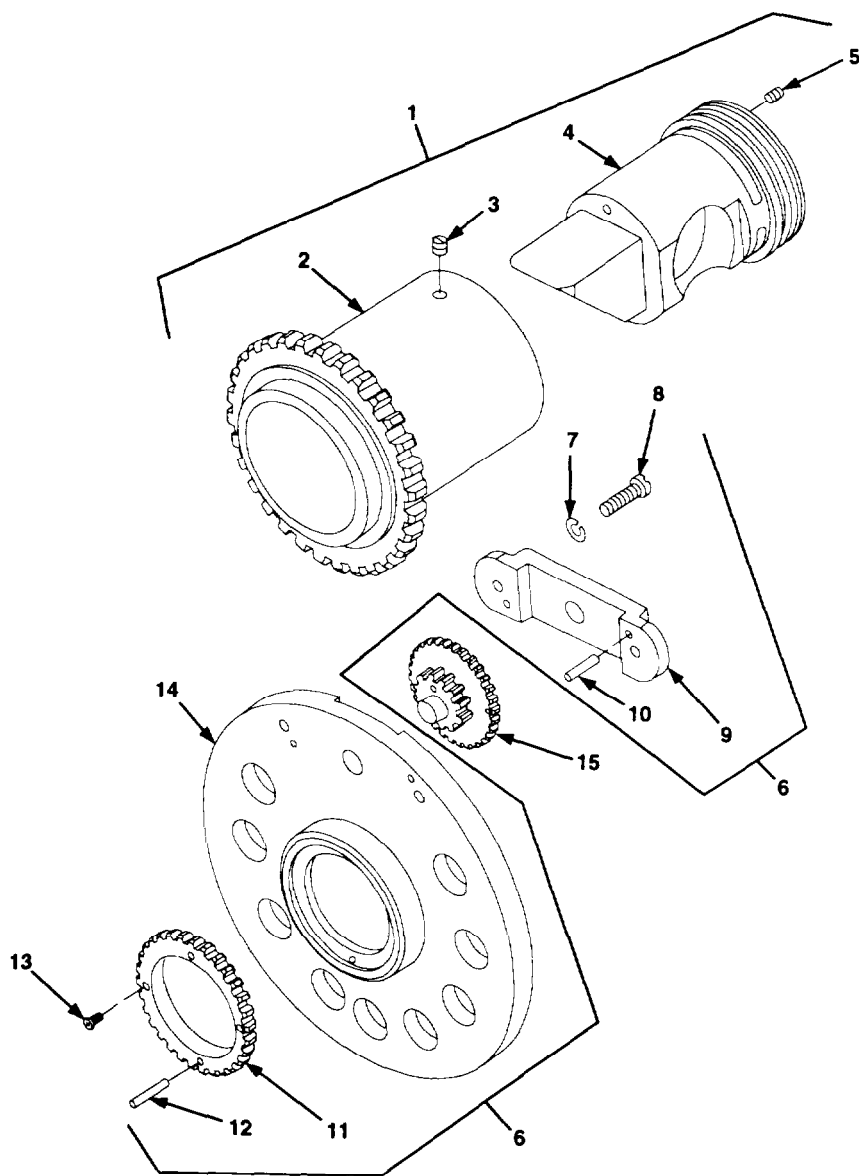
Prism Assembly, Dove 7660457; Including Gear, Prism, Optical 7660458; and Support, Pinned 7660460
